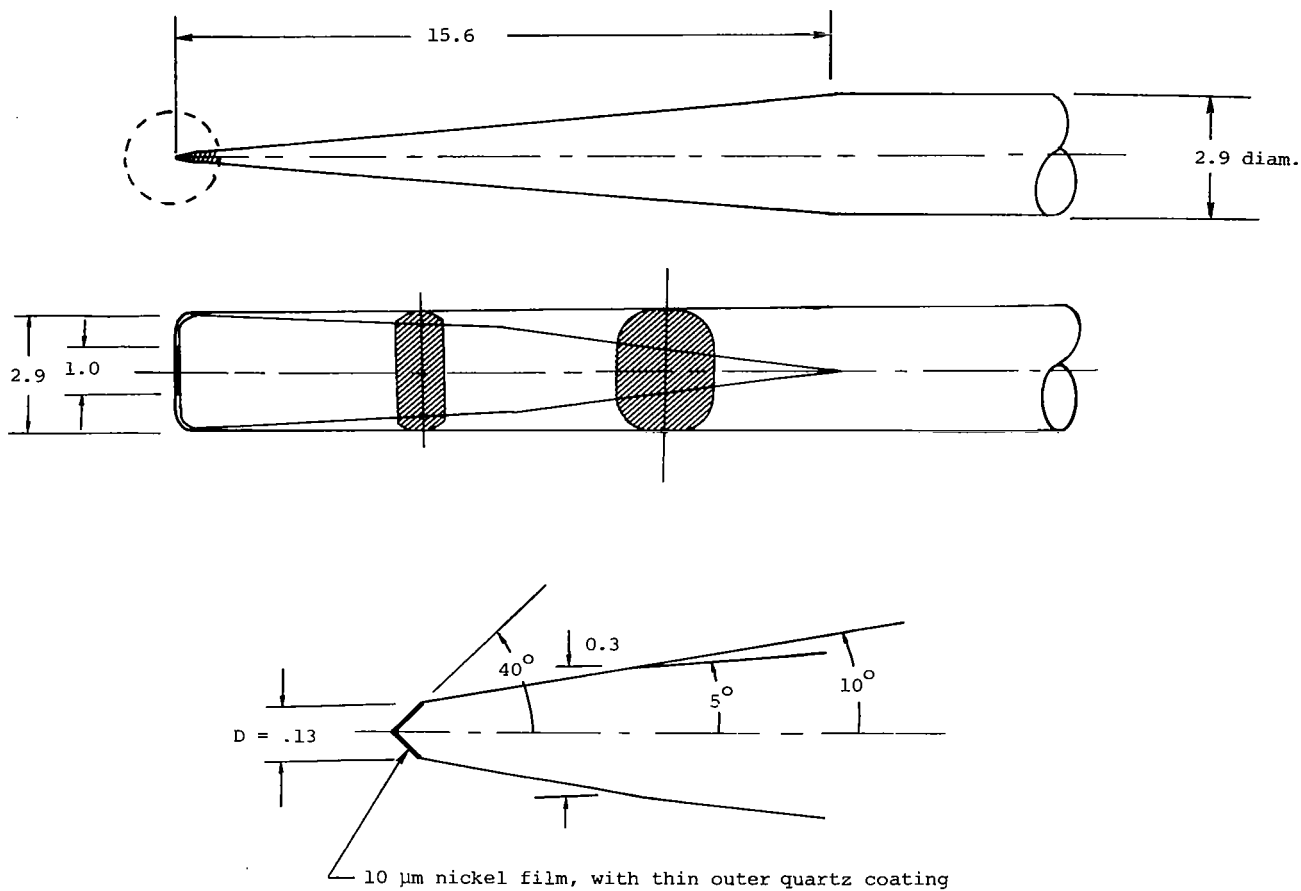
Commercial hot-film wedge probe. Linear dimensions are in millimeters.
